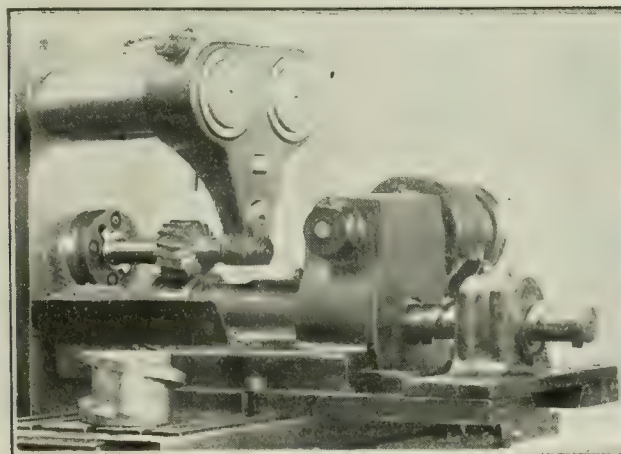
USING THE MILLER FOR BORING OUT BUSHING HOLES.
